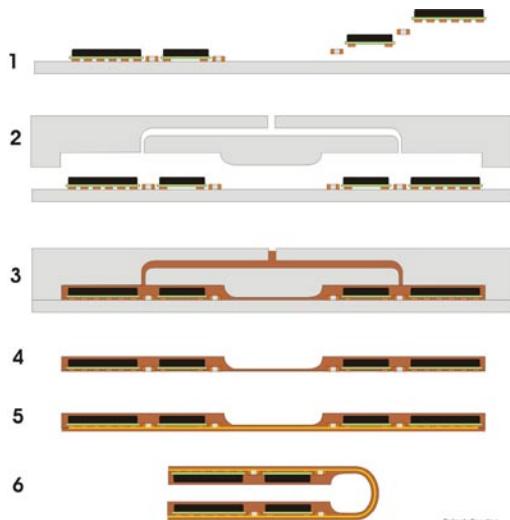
Injection molding allows for monolithic assembly and the integration of component stiffener and flexible interconnections according to the following plan: 1) Place components in mold; 2) Clamp mold; 3) Injection mold components in situ including strain reliefs; 4) Remove from mold; 5) Form metal circuits and coat with insulator material; 6) Form to desired shape.
